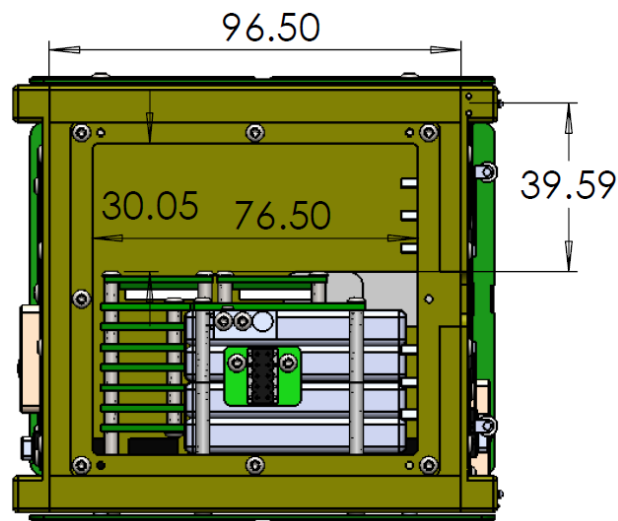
Inner dimensions of payload volume along Z axis. Also shown are the dimensions of each access panel on +/-X faces.
